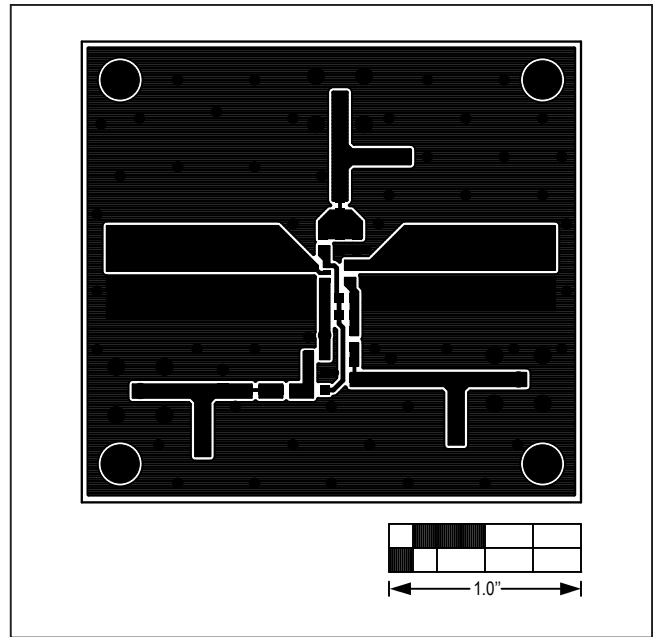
MAX44250 EV Kit PCB Layout—Component Side
